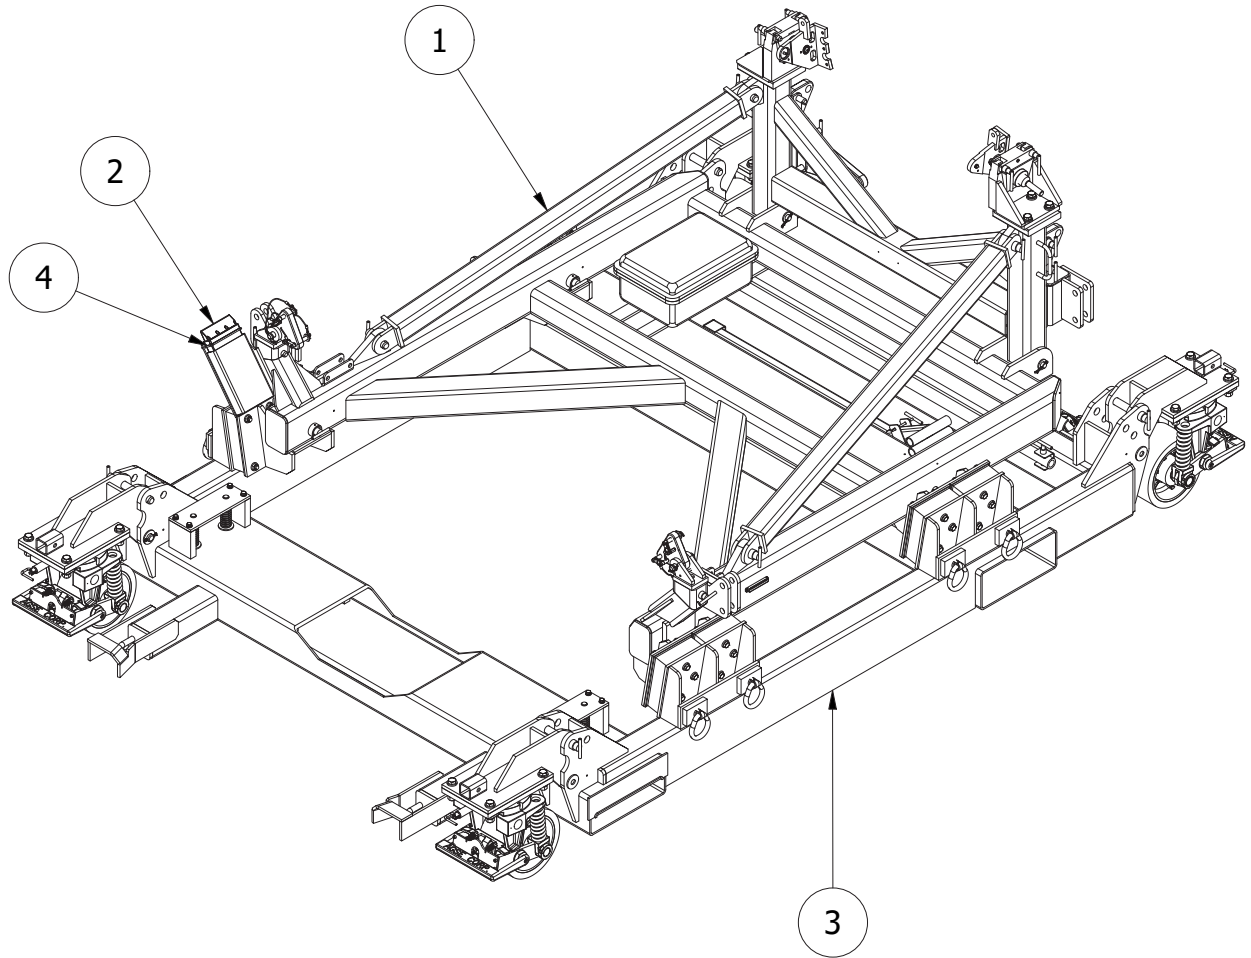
AGSE-E240-G01 Engine Transport Stand
